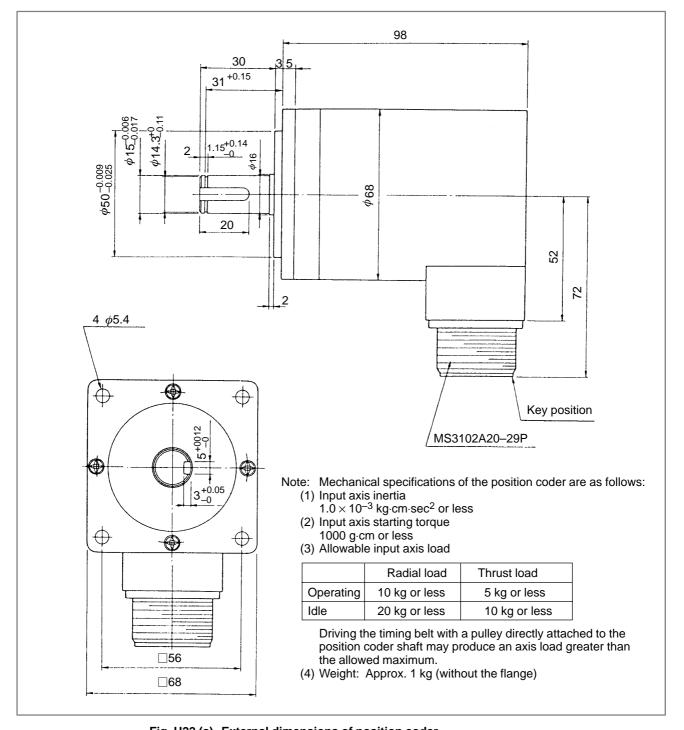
(a) External dimensions of position coder Specification No.: A86L-0027-0001#102 (Max. 4000 rpm) A86L-0027-0001#002 (Max. 6000 rpm)
